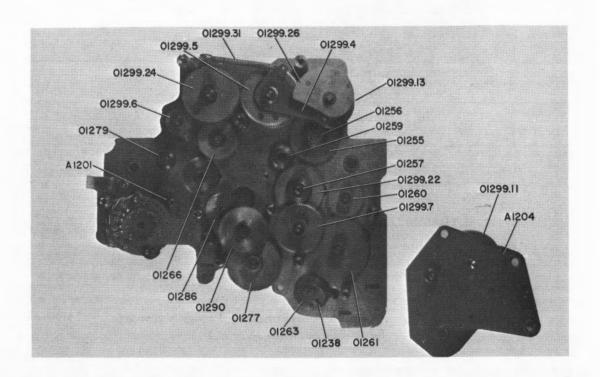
Frequency Selector, Front View of Rear Plate, Small Gear Plate Removed (AN/URC-9A)
